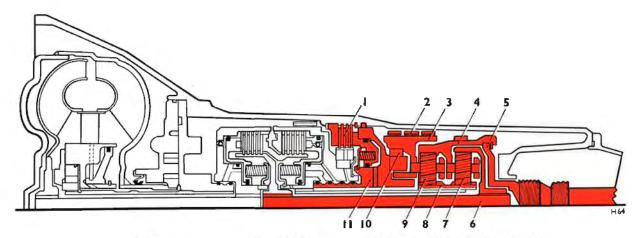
Sectioned view of the transmission showing the intermediate clutch and gear unit
